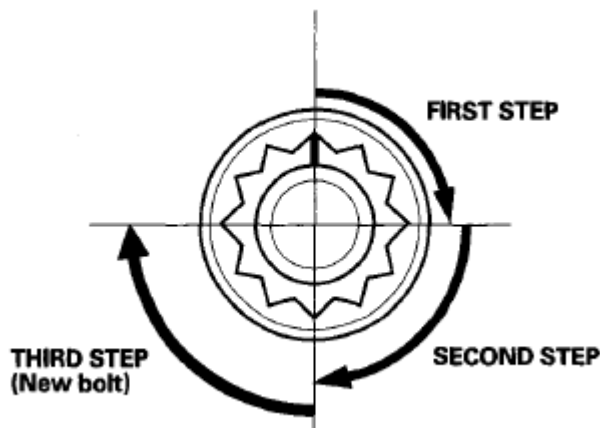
Identifying Cylinder Head Bolt Tightening Graph
